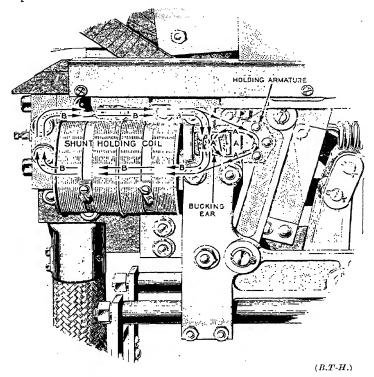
Sketch Showing Magnetic Circuits of Holding Coil and "Bucking" Bar
